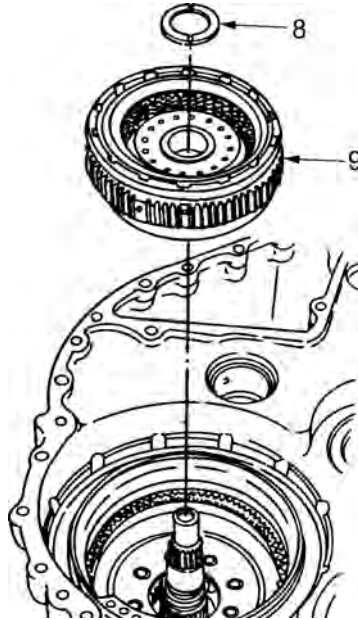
Fourth and Reverse Clutch Assembly Removal.
